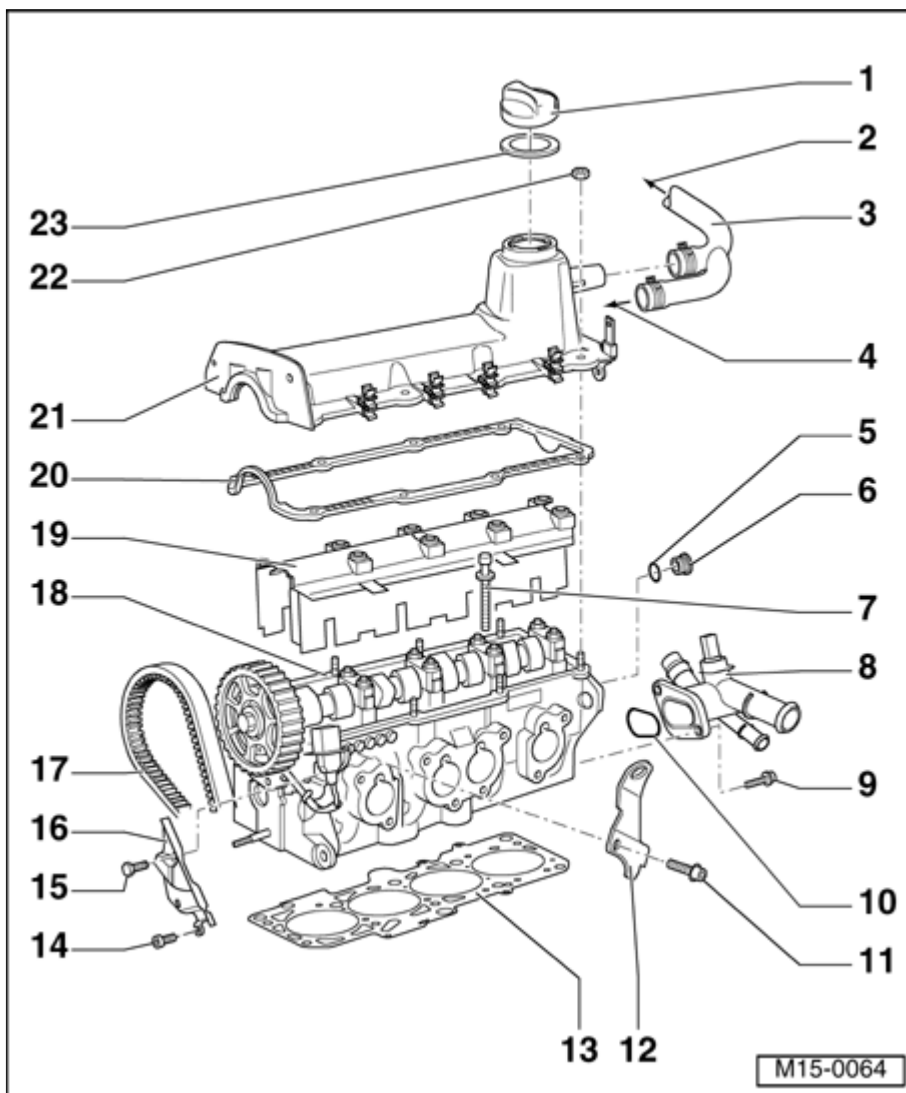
Exploded View Of Cylinder Head Components - Engine Codes AEG, AVH, AZG With Aluminum Plate Cylinder Head Gasket
